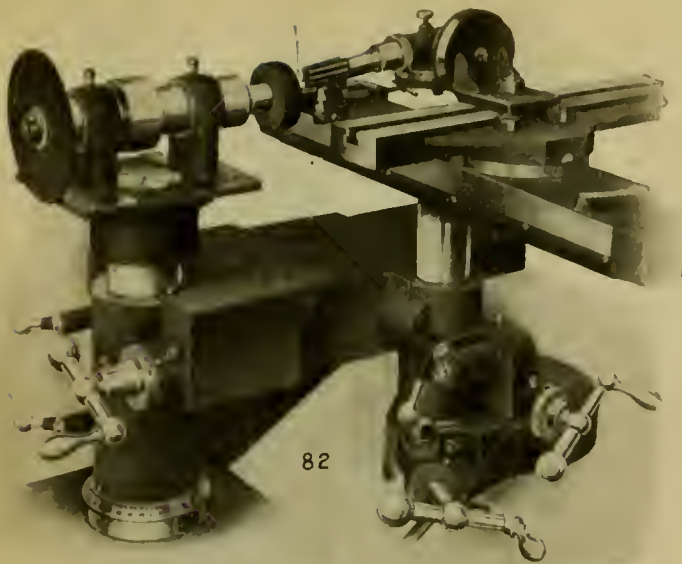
SHARPENING END TEETH OF AN END MILLING CUTTER.
